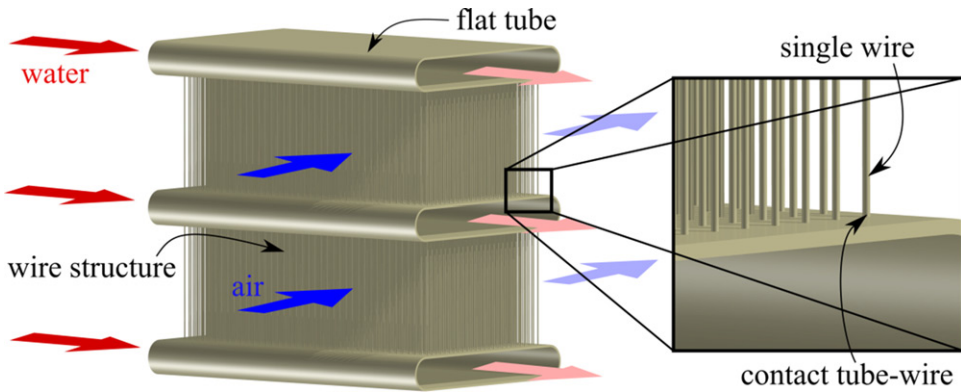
Concept of a flat tube heat exchanger with plate-fin wire structure.
